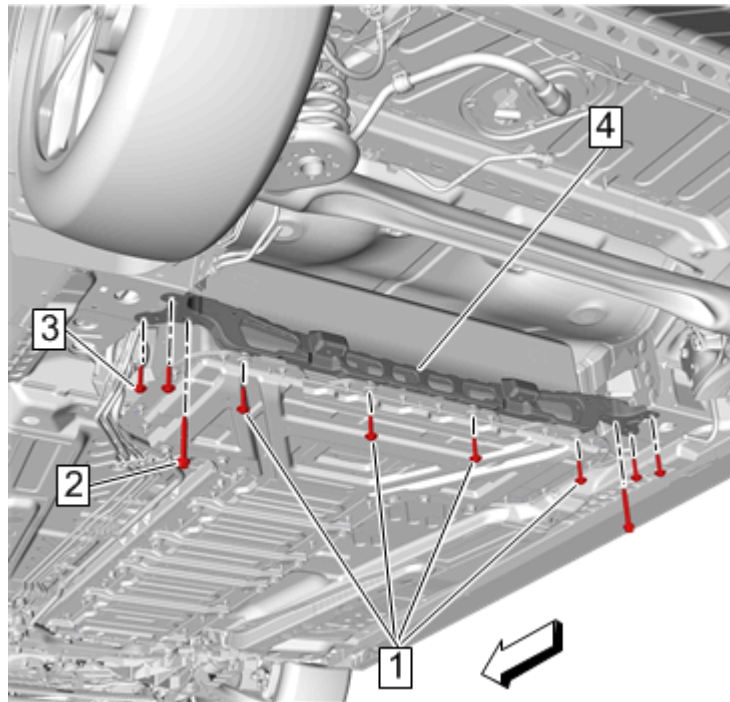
Floor Panel Number 4 Crossbar, Drive Motor Battery Tray Bolts And High Voltage Battery Hold Down Retainer Bolts
